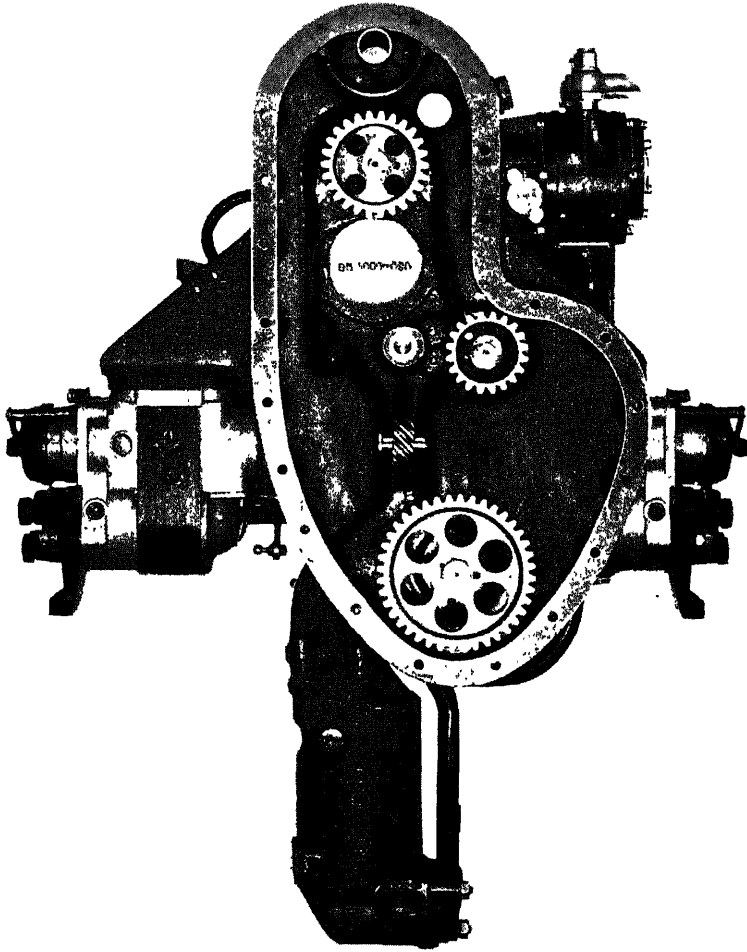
INTERIOR OF REAR COVER SHOWING AUXILIARY DRIVES
